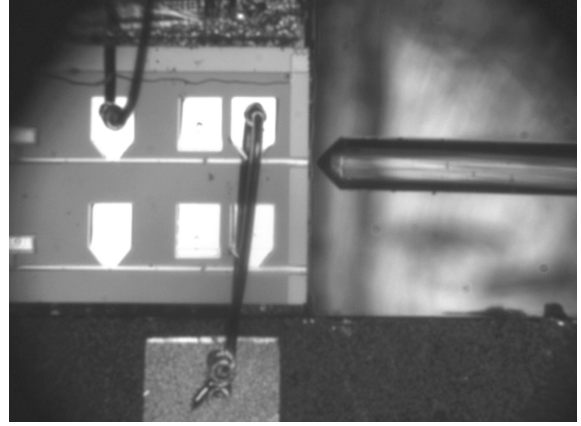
Microscope view of inside the butterfly package showing wire-bonds and lensed optical fibre.
